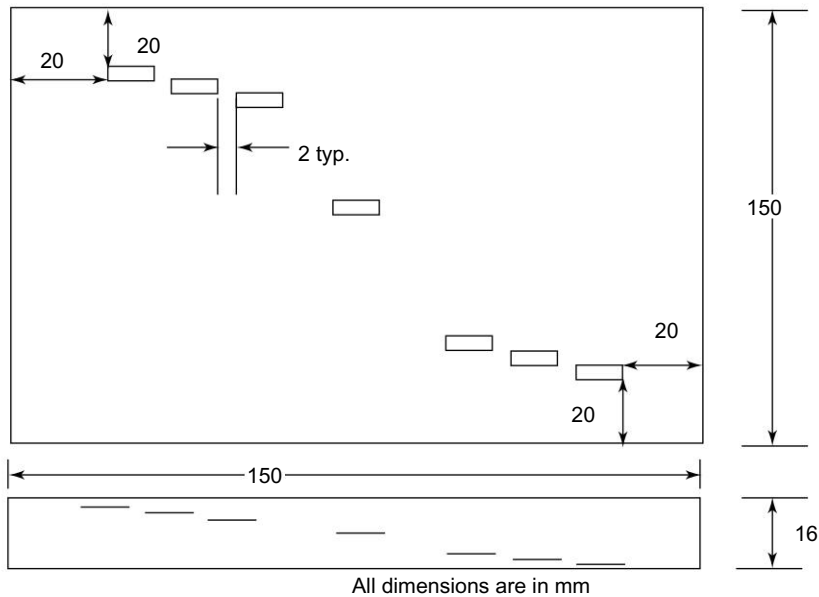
Flat Calibration Specimen with Implanted Defects of Size 5×3 mm
